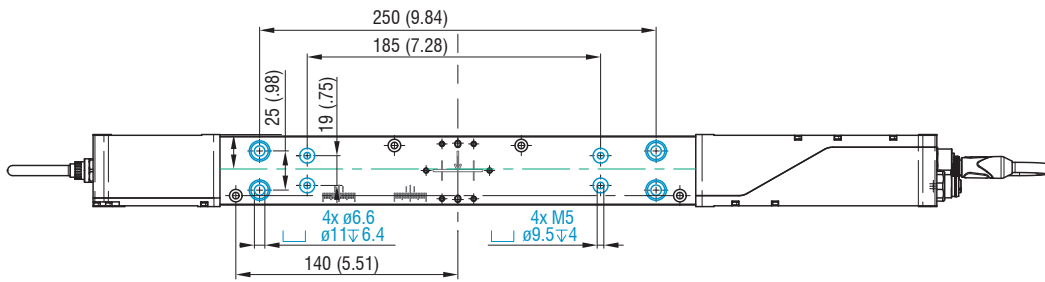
Dimensional Drawing of Mounting Rail, Optional Mounting Method
